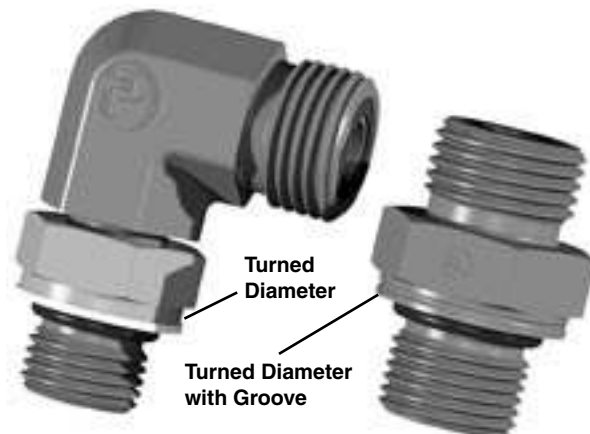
Metric Seal-Lok Straight and Shaped Connectors with Identification for use with ISO 6149-1 Port
